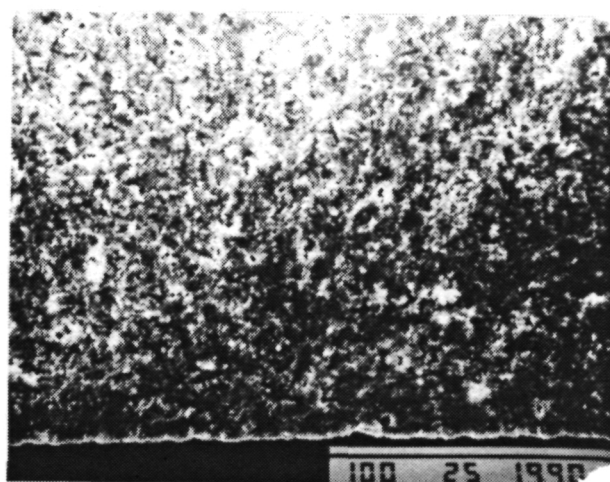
Typical fracture origin (surface flaw) observed in test bars cut from Carborundum sinter/HIPed SiC rotor S/N FX78520.
